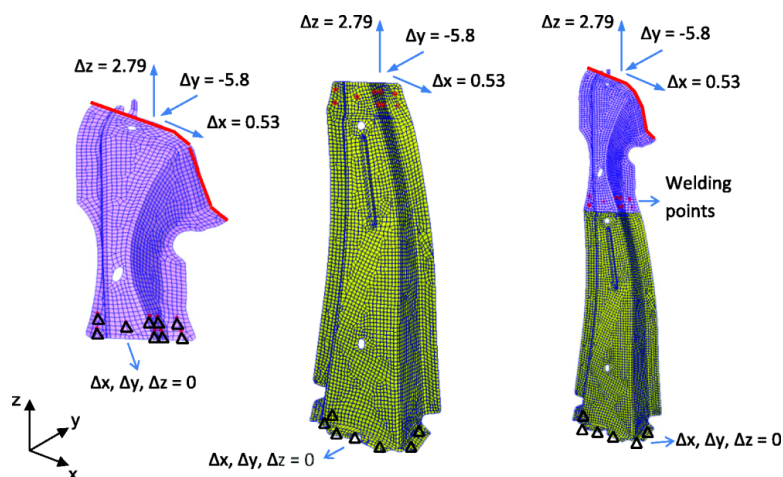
Torsional displacement load cases considered (mm). Left: upper C-pillar, center: lower C-pillar, and right: upper and lower C-pillars connected by welding points.
